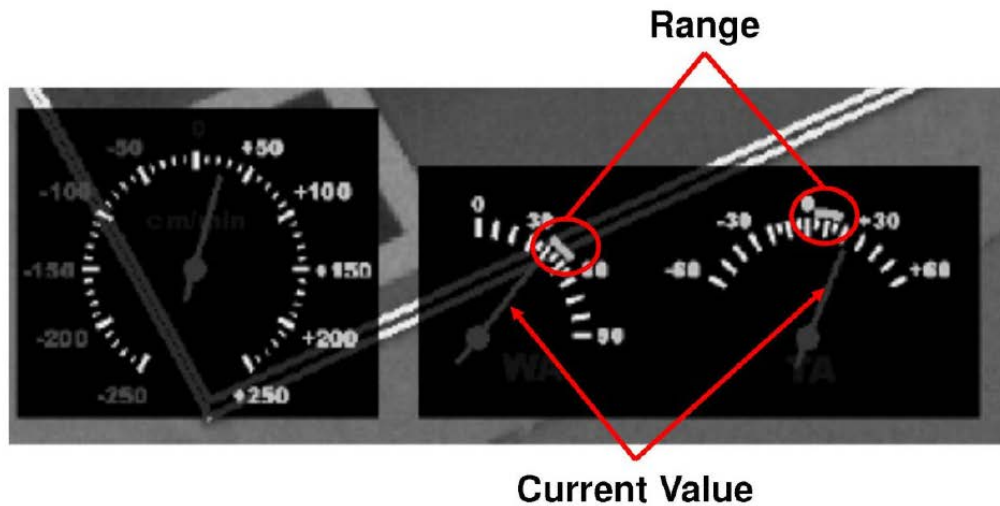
View of the welder enriched displaying the thickness of the welding seam
